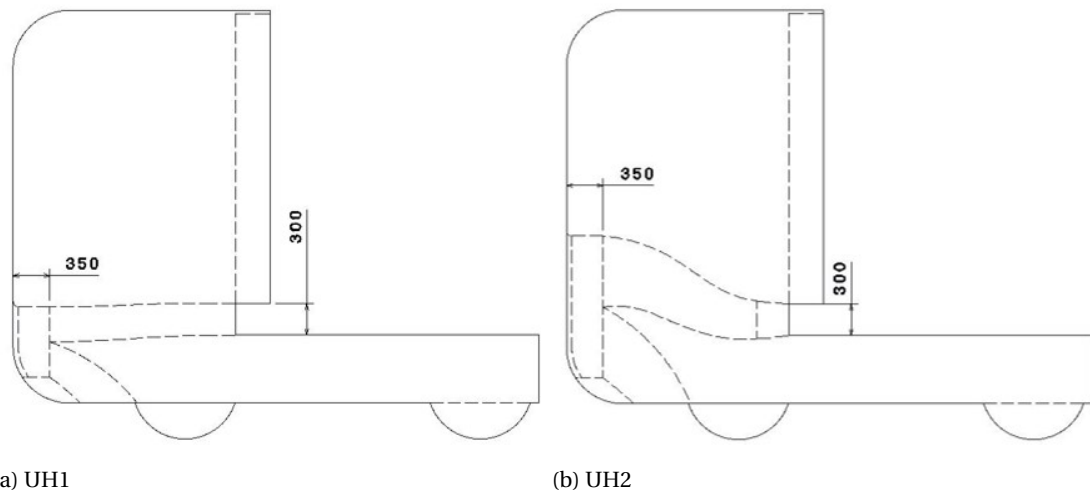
Side view of the models with underhood showing the outlines of the top and bottom ducts, dimensions in *mm
